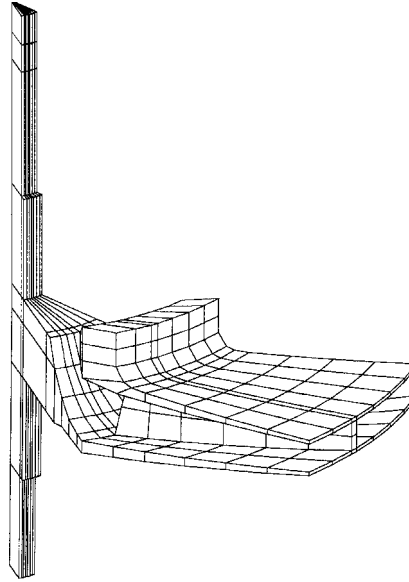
The finite element mesh of the basic sector (1/13th of the entire assembly).
